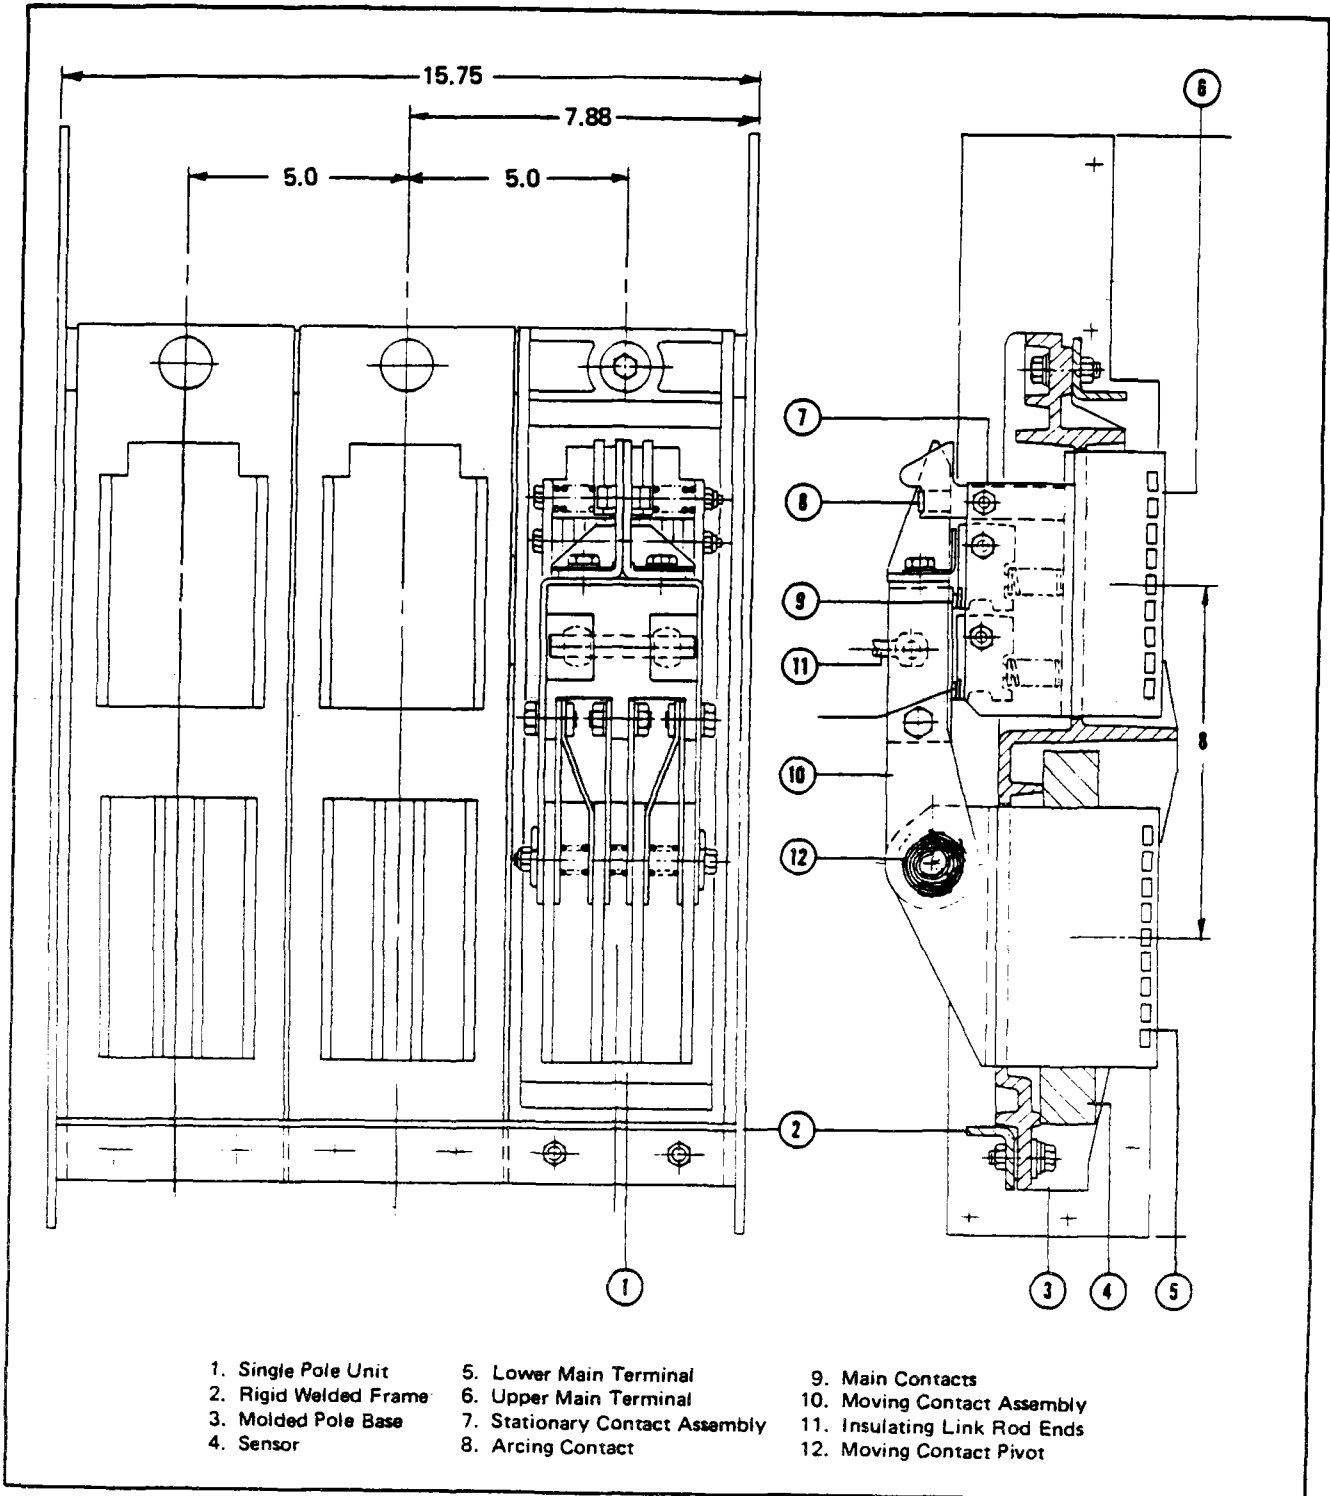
Three-Pole Assembly of DS-632 Pole Units on Frame
